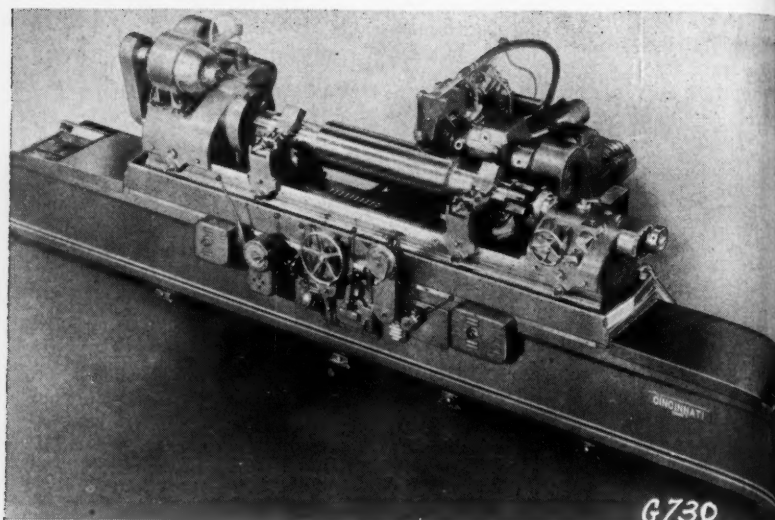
A large grinder with six motors to take care of various grinding operations.
